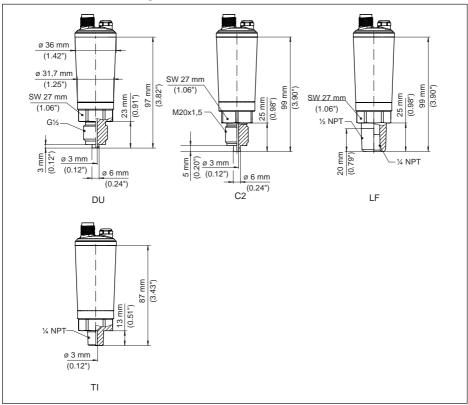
VEGABAR 29, threaded fitting not front-flush
